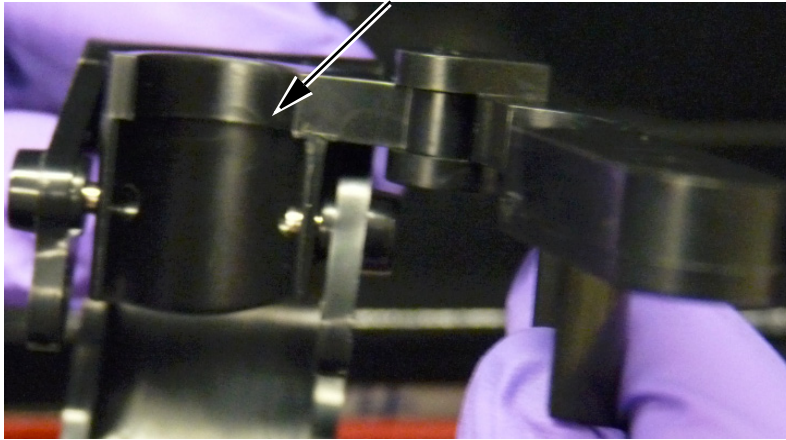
Location of Shelf on Scott Spray Chamber Clip Assembly
